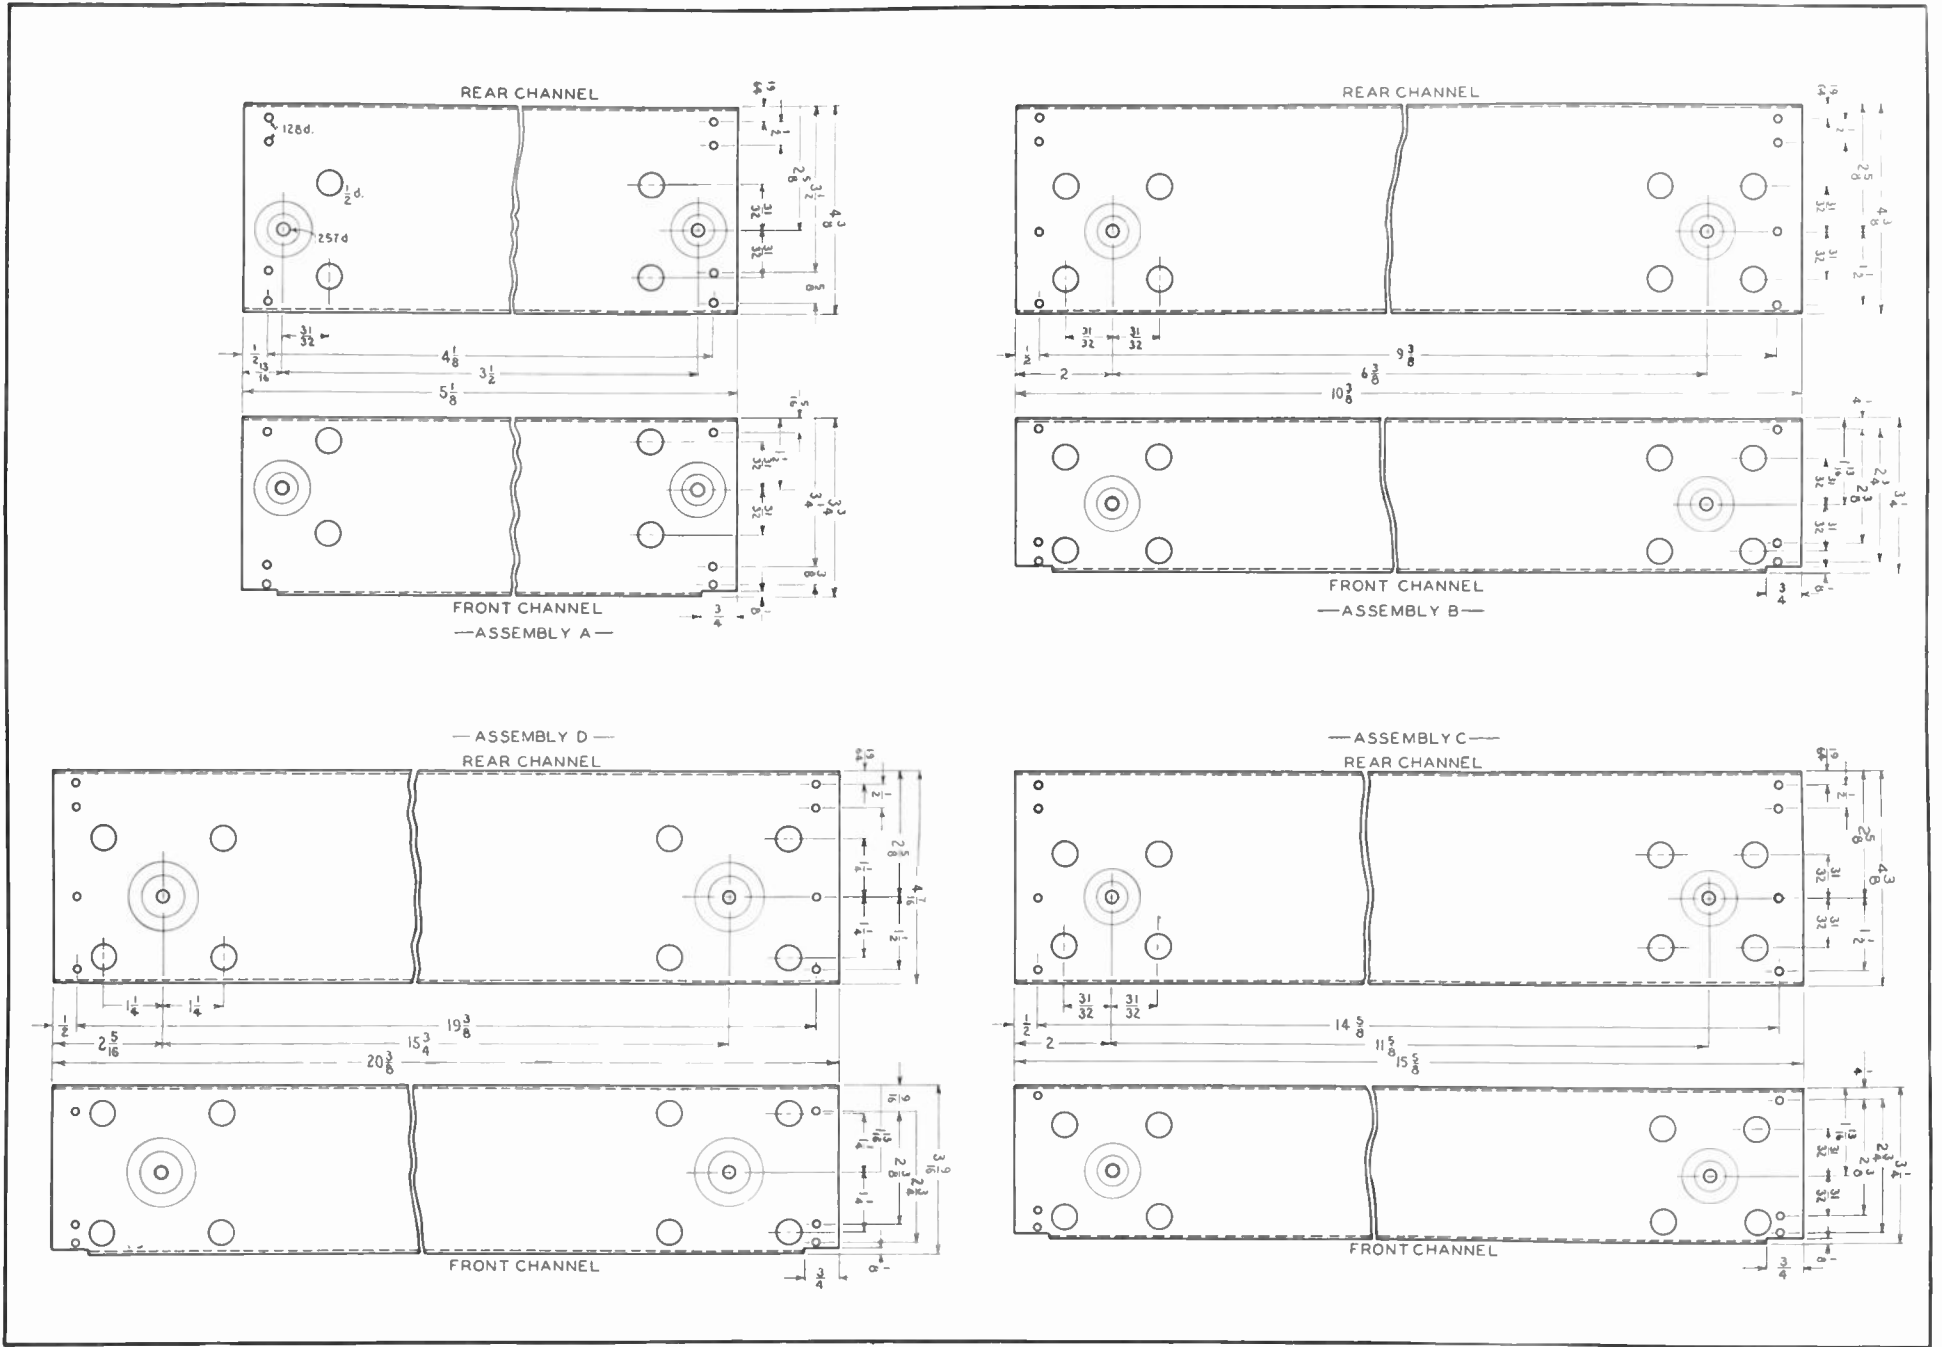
ESSENTIAL DIMENSIONS OF THE FRONT AND REAR CHANNELS FOR THE A, B, C, AND D AIRCRAFT RADIO RACK ASSEMBLIES, ARRANGED FOR READY COMPARISON
